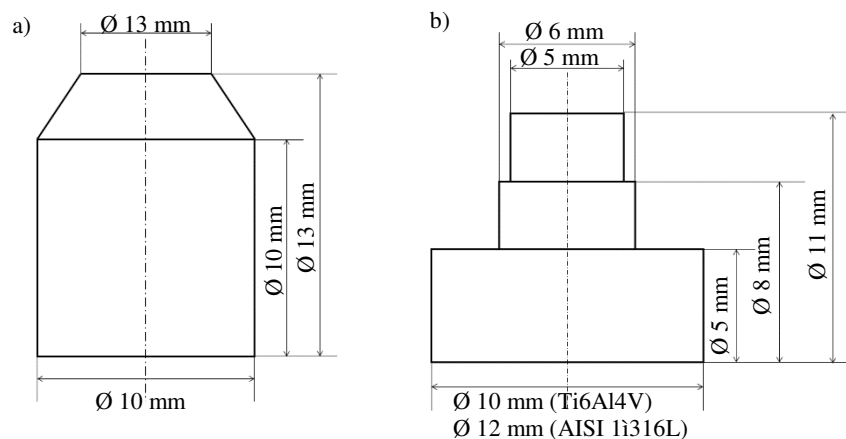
Shape and dimensions of pins for a) wear tests and b) fretting tests
